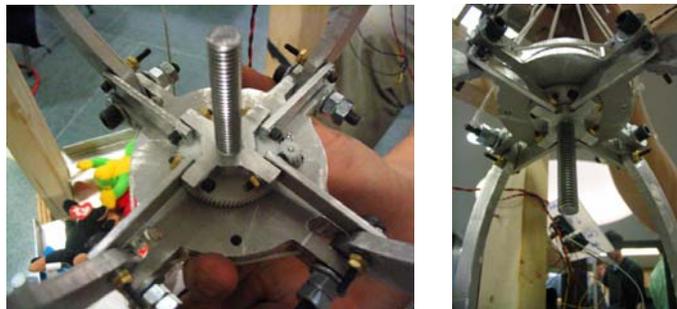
Northwestern crane game claw: mechanical assembly (Muszynski & Roller, 2009).
